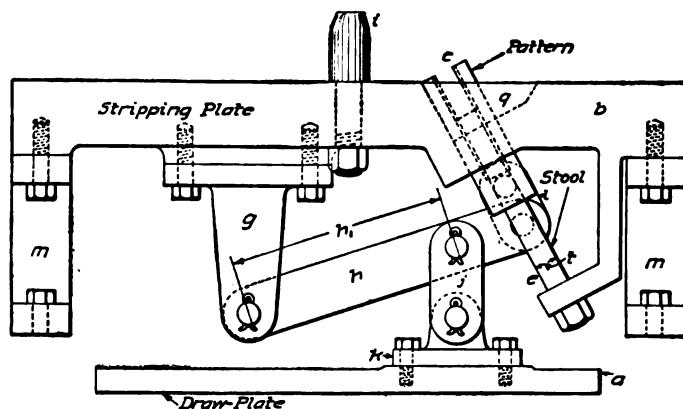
End Elevation of Pattern Equipment for Reid Hand-Rammed Stripping-Plate Machine
